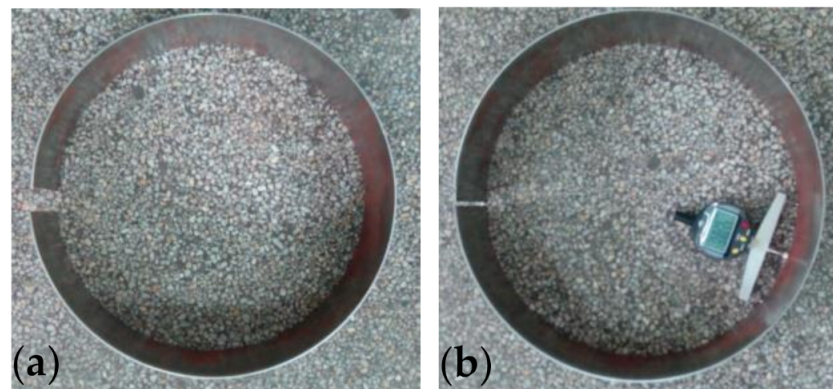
Forming part: (a) Before modified rolling, (b) After modified rolling.
